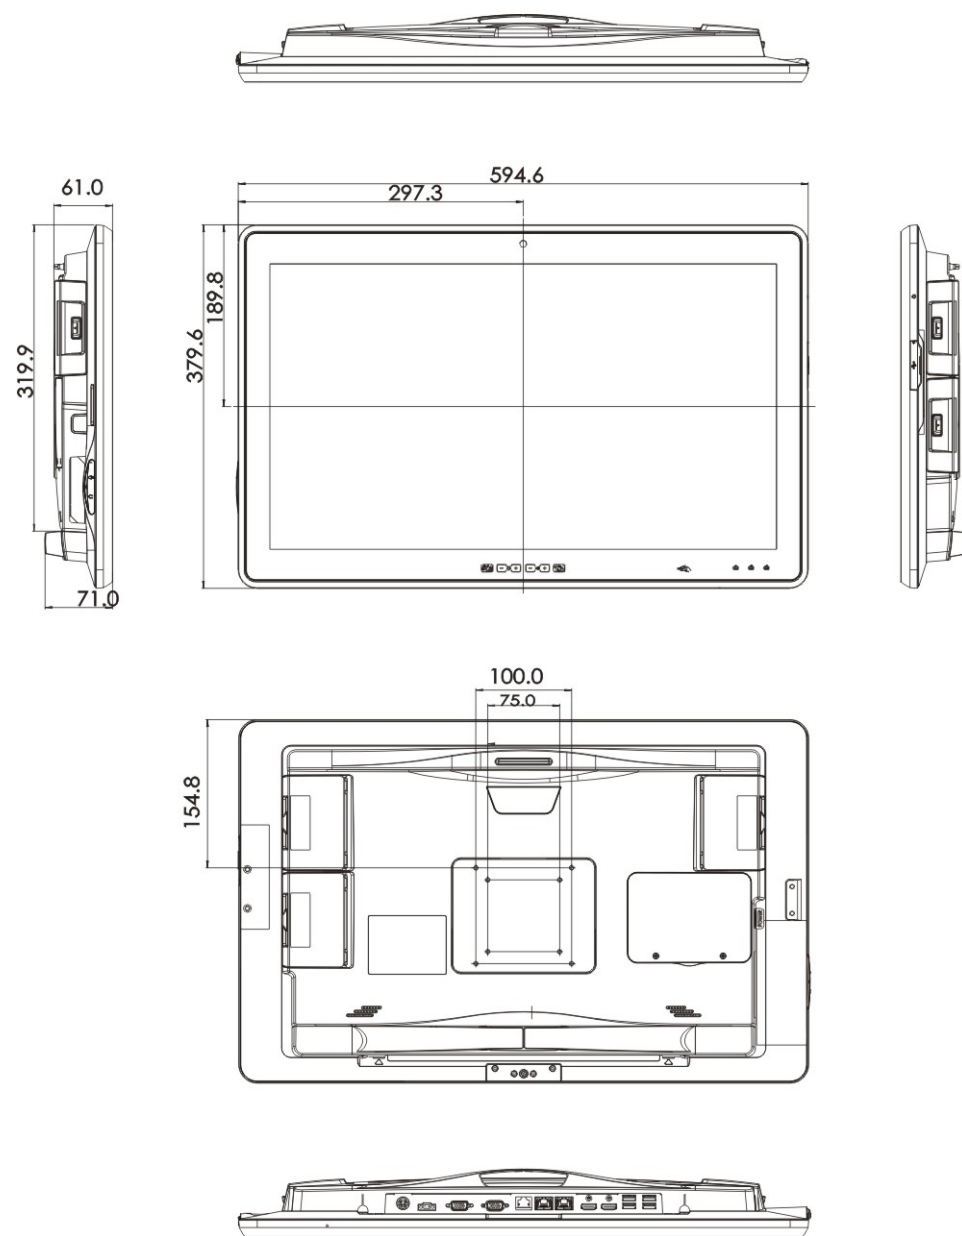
POCm-W24C-ULT3 Dimensions (mm)
